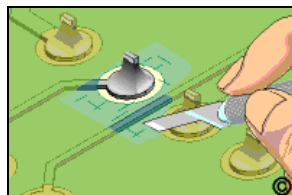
Scrape away damaged or unwanted coating with a Knife, Pick, or Scraper.
